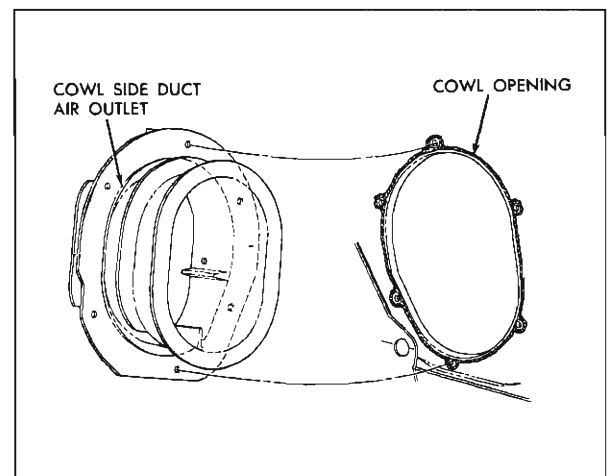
Cowl Side Duct Air Outlet Sealing
